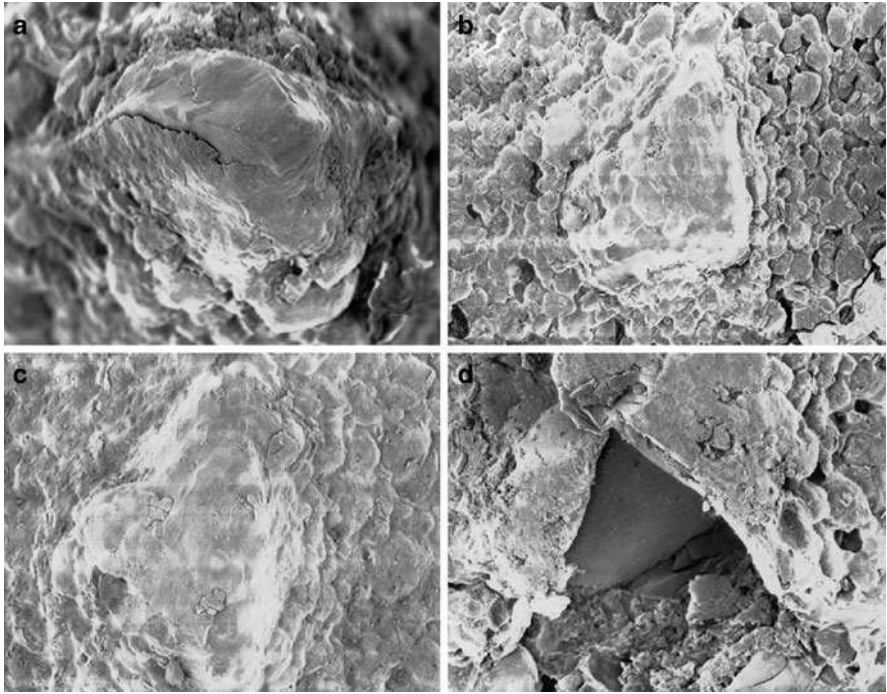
Abrasive belt wear status after polished (a) one workpiece, (b) two workpieces, (c) three workpieces, (d) four workpieces [16]
